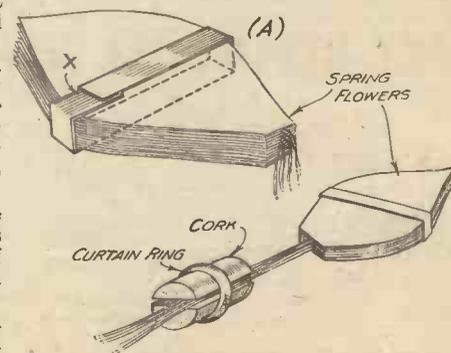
Clip and string fastening for bunch of spring flowers.
